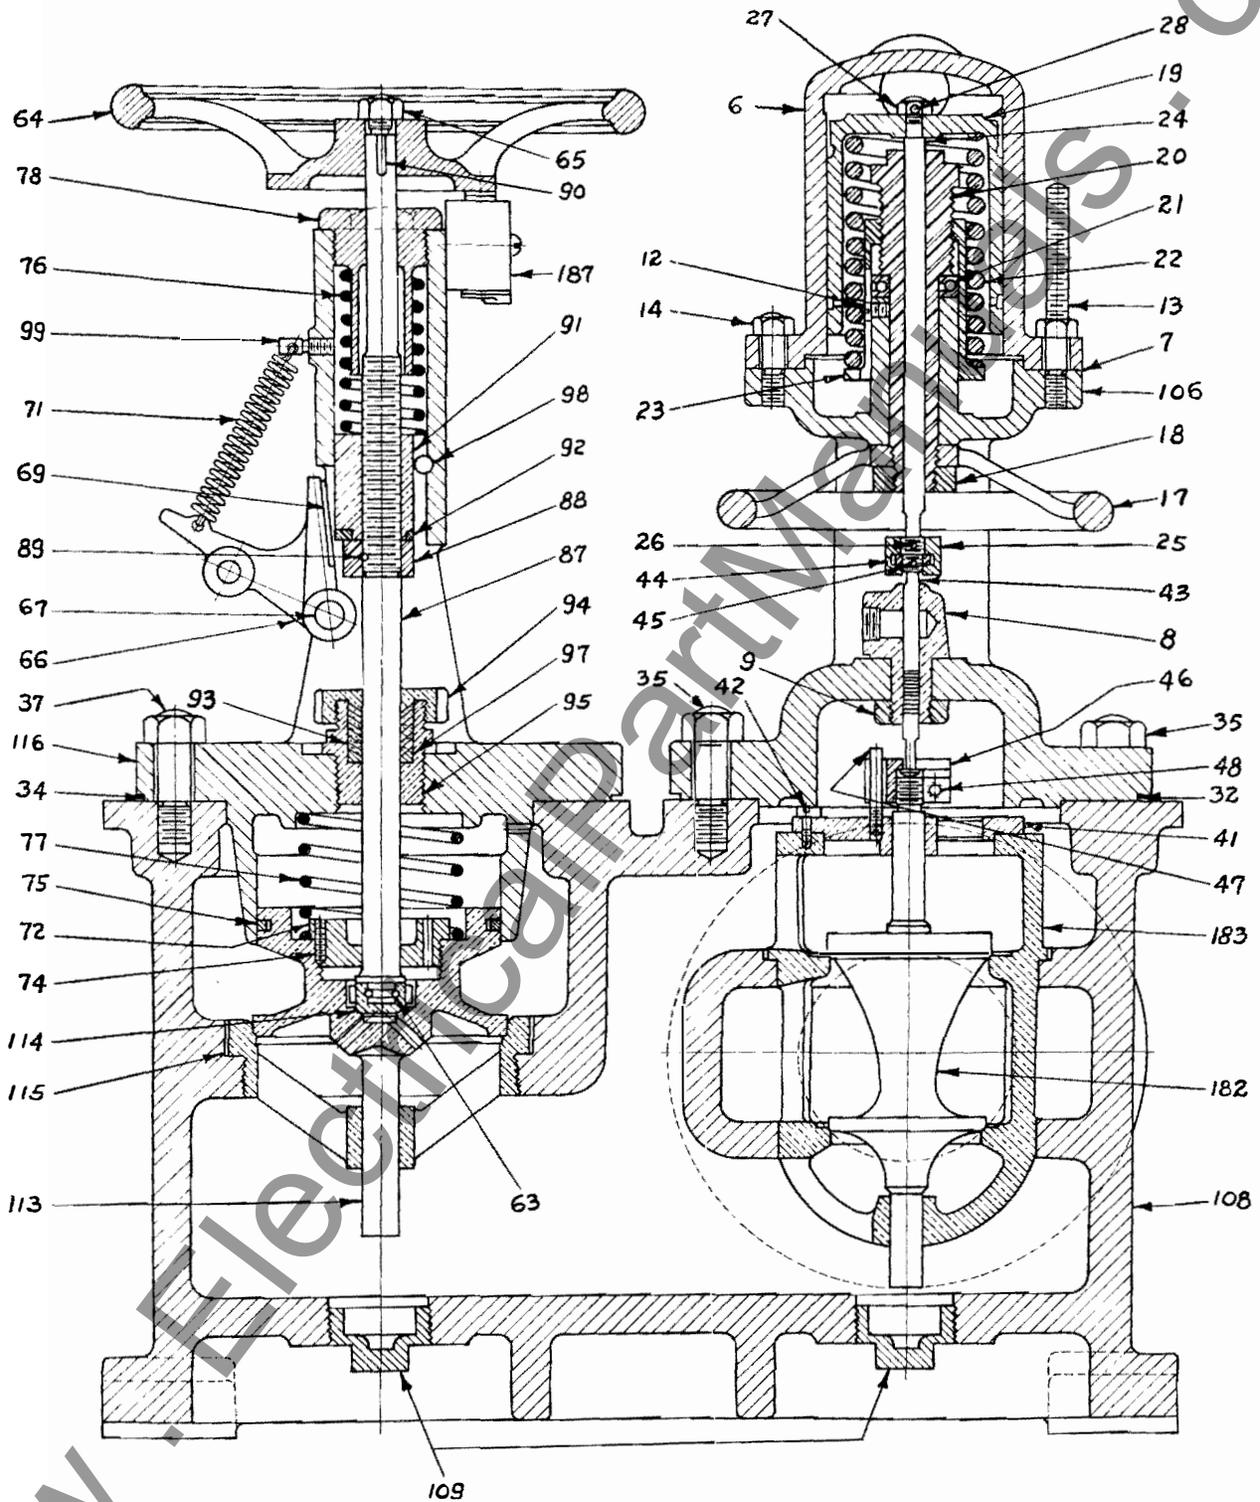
GOVERNOR, STEAM CHEST AND THROTTLE VALVE
